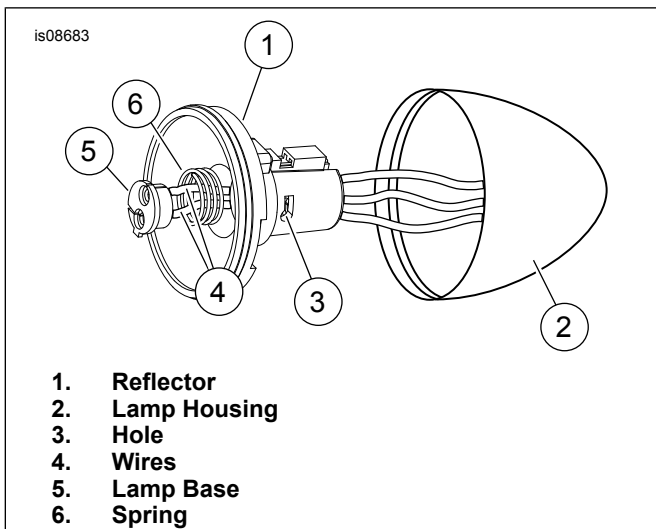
Socket, Lamp Housing, Wires, Lamp Terminal Base and Spring
